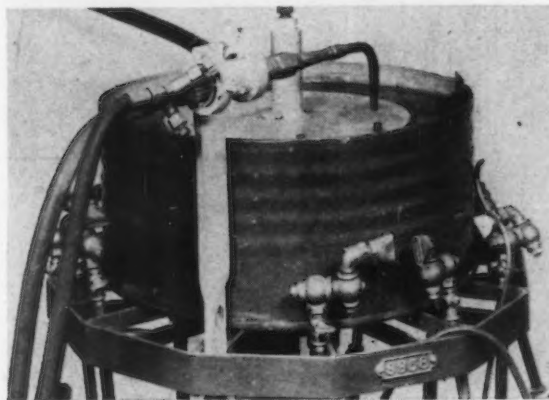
C—Setup for small cylindrical parts that are set vertically in holes in the rotating disk. After heating under the torch, the parts fall through a hole in a fixed disk below the rotating one and enter the quench.
